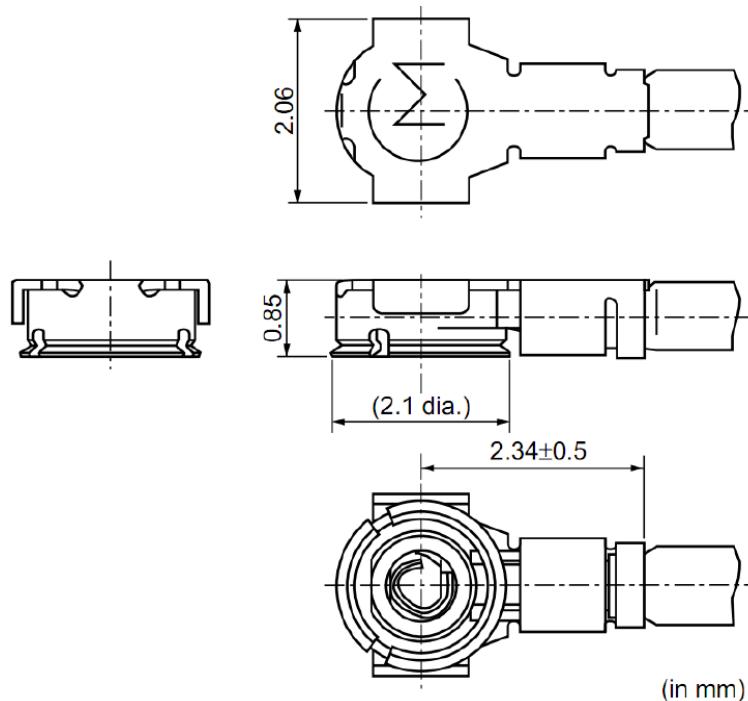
Dimensions of Mated Plugs (\varnothing 0.81 mm Coaxial Cables) (Unit: mm)
